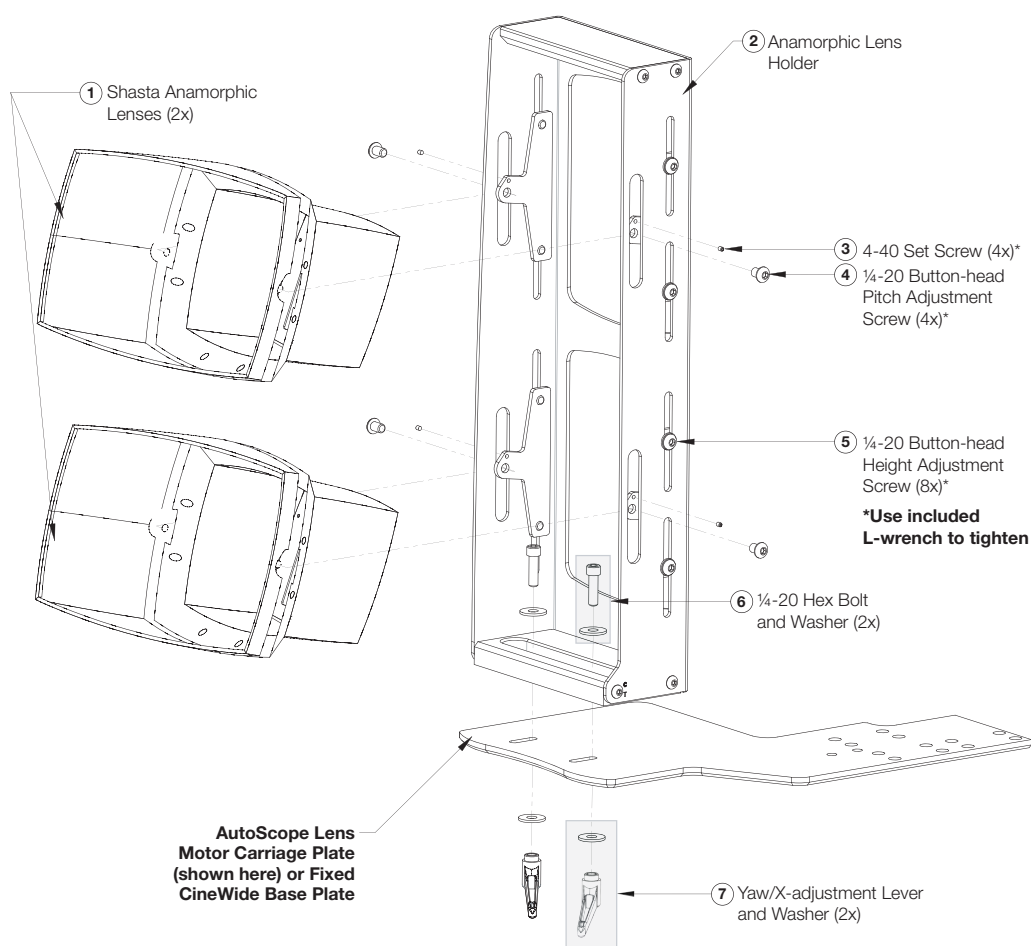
Shasta Anamorphic Lens Mounting Assembly - Exploded View
